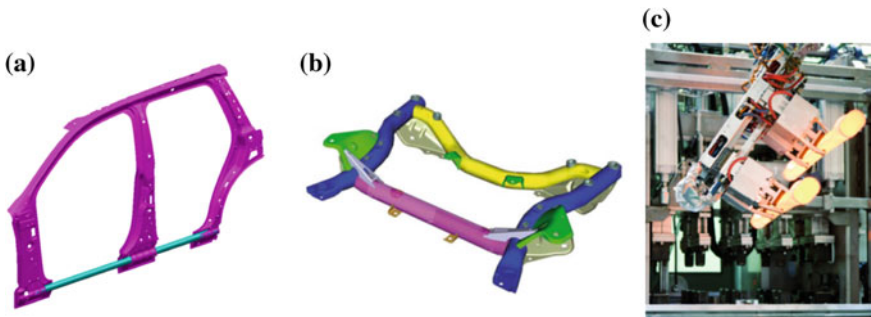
Hot tube forming examples: a rocker reinforcement of Porsche Cayenne (SOP 2002), b front subframe of Mercedes C-class (SOP 2007) [31]; c indirect hot forming of torsion beams [22]
